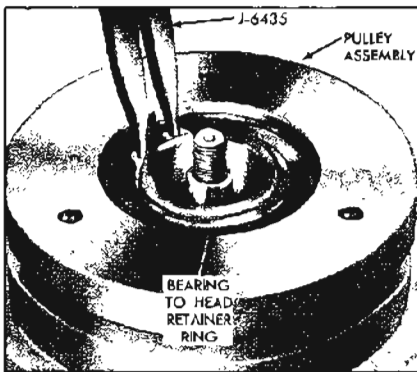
Removing or Installing Bearing to Head Retainer Ring
